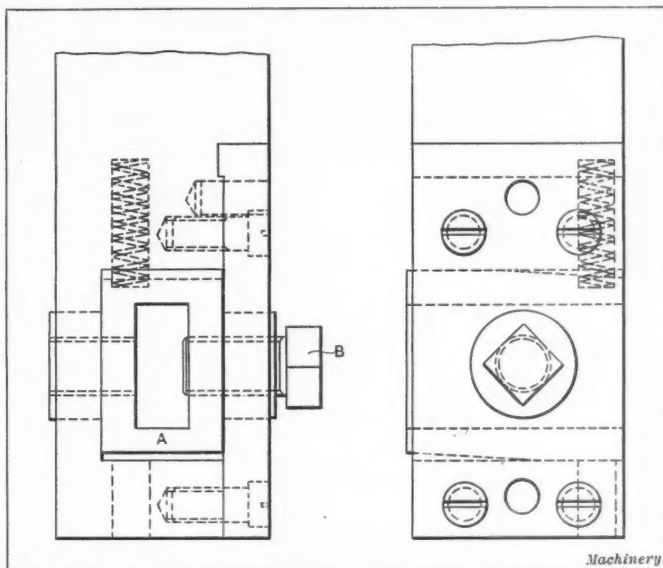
Slotting Machine Tool-holder adapted for Small Work
